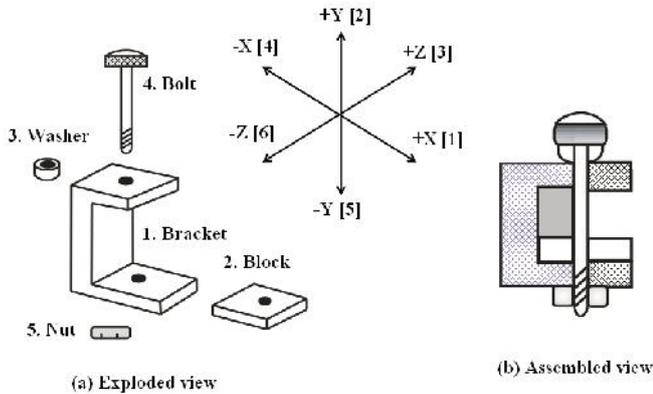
An example of assembly of a mechanical connector in Cartesian coordinate system
